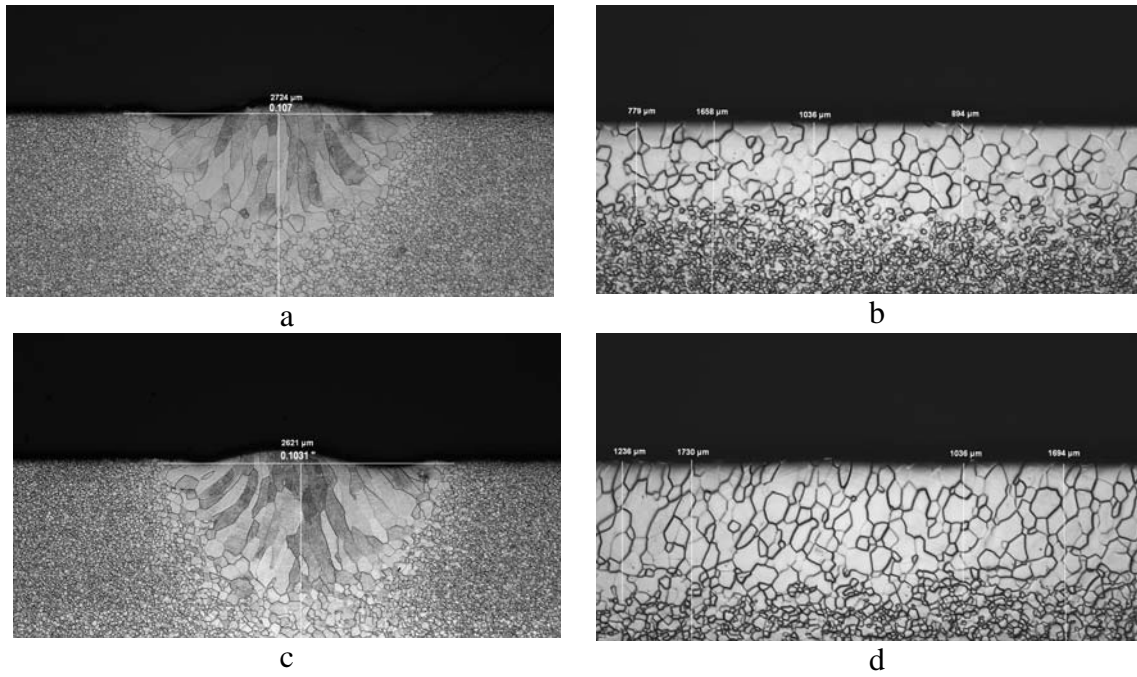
Results of the bead-on-plate electron beam welds on vanadium. a) Weld 1 cross section (+50 defocus), b) weld 1 longitudinal section, c) weld 2 cross section (+45 defocus), d) weld 2 longitudinal section.
